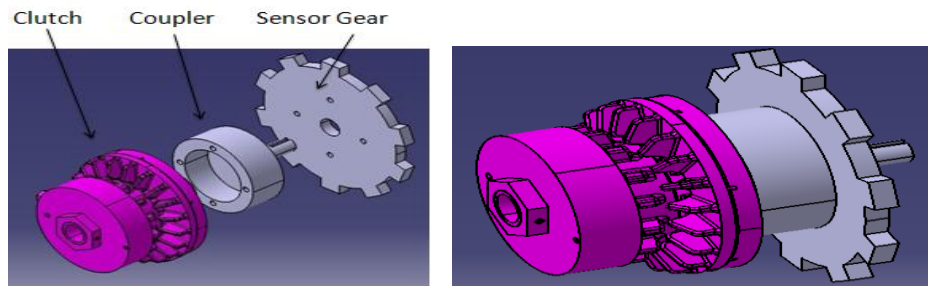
Parts of the Clutch Model (Left); Assembled Model (Right)
